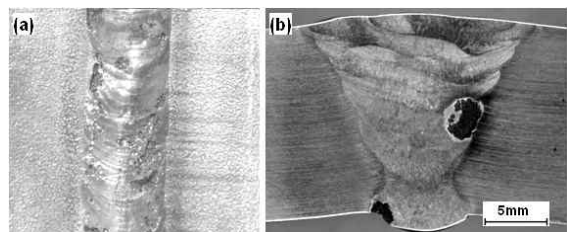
(a) Root & (b) cross-section of weld metal after pitting test
